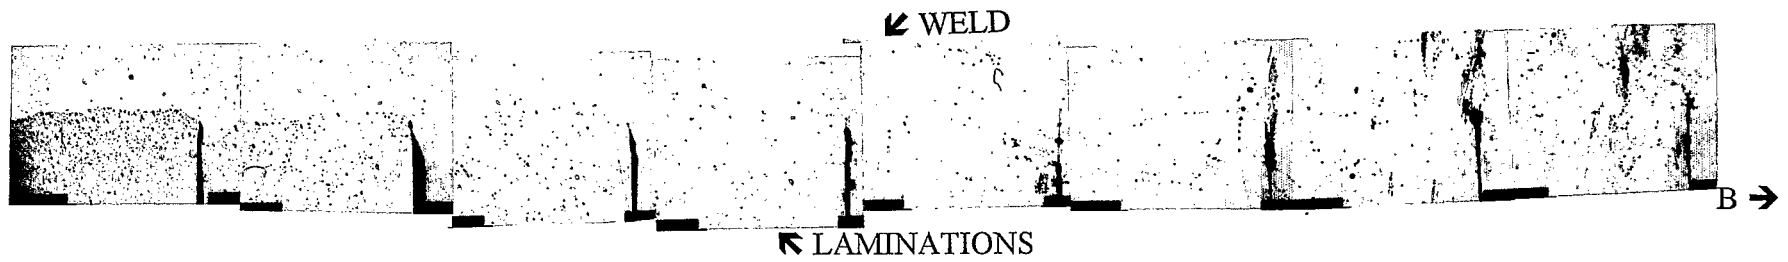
RHIC Dipole Longitudinal Weld Test Specimen
